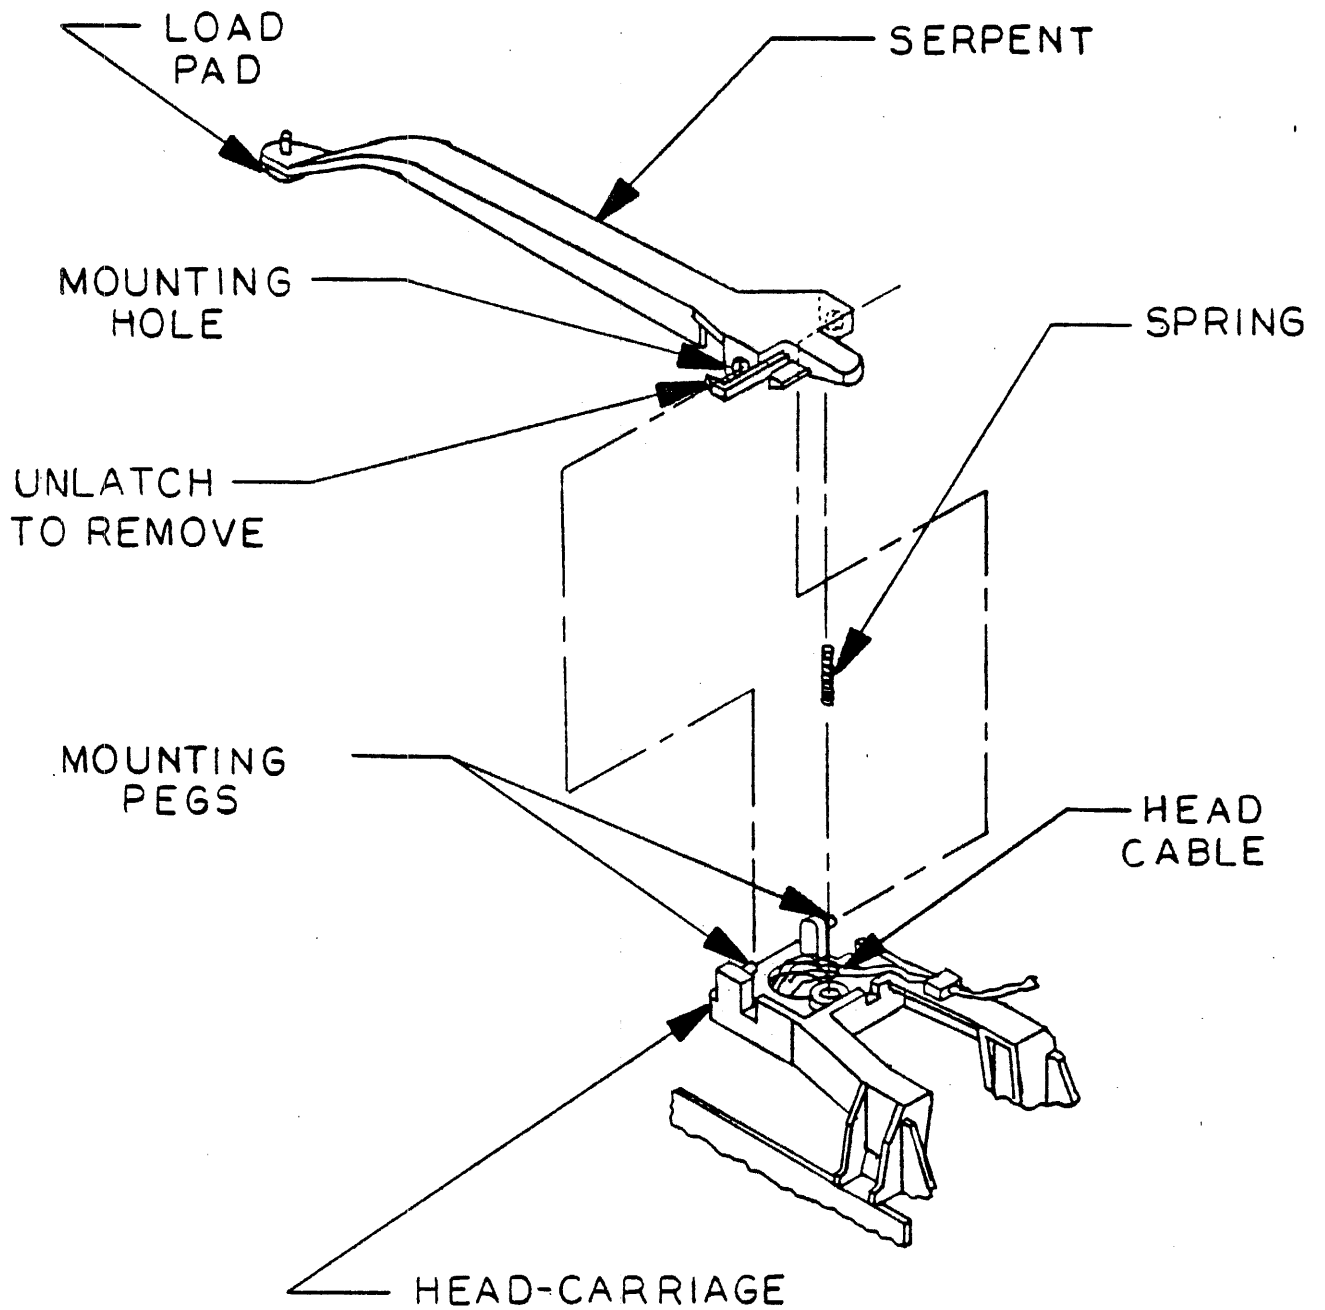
THE REMOVAL OF THE SERPENT FROM THE HEAD CARRIAGE.
